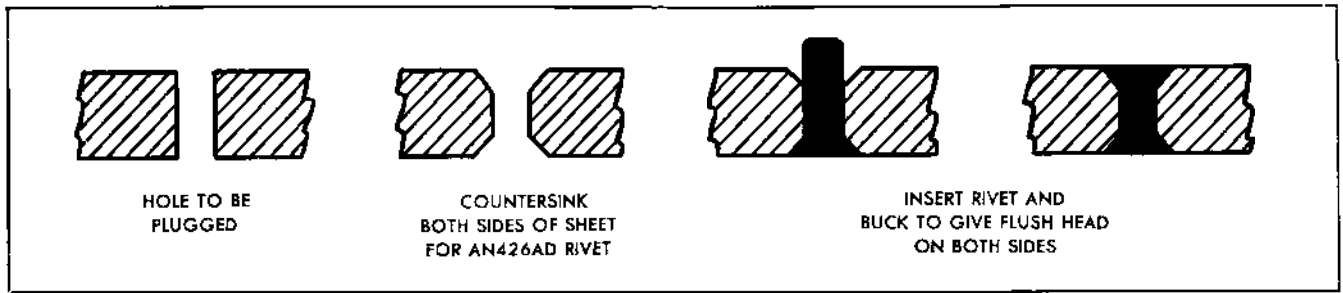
PROCEDURE FOR PLUGGING RIVET HOLES
